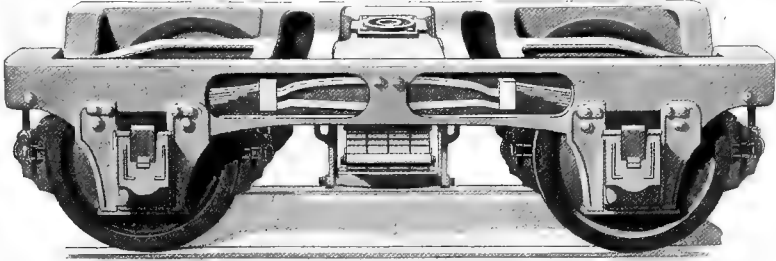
Four-Wheel Top Equalizer Truck. Commonwealth Steel Company.
